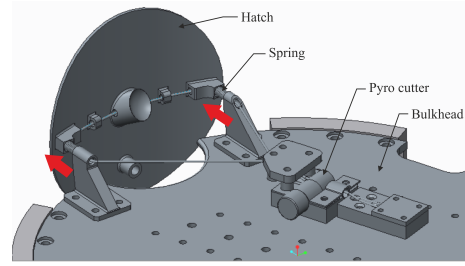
CAD drawing of one hatch system including fixation wires, ejection springs and pyrocutter.
